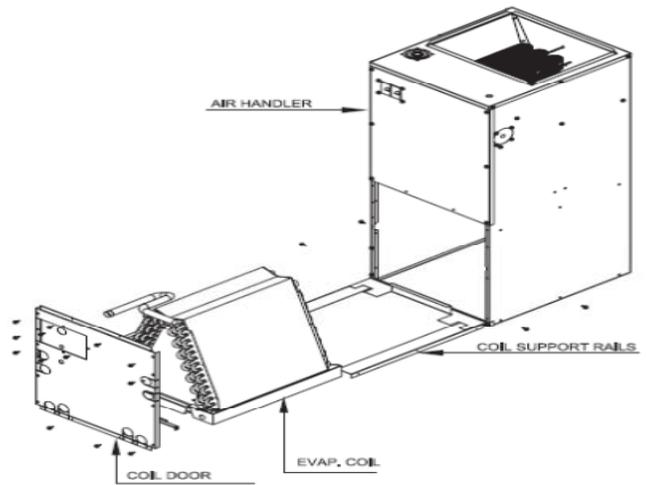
Evaporator Coil Disassembly for conversion to downflow.
